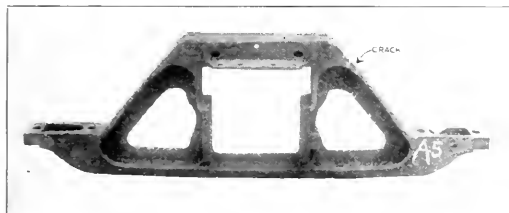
SIDE FRAME BEFORE WELDING
